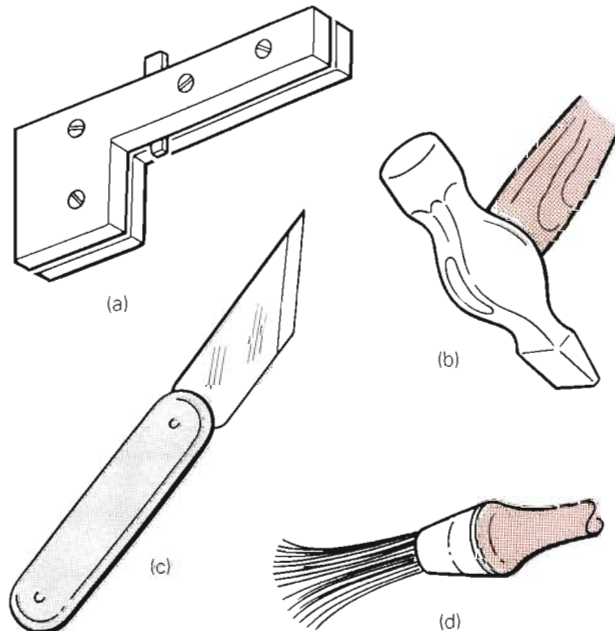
Tools used in surface decoration: (a) scratch stock, (b) cross-pein hammer, (c) knife, (d) brush.
